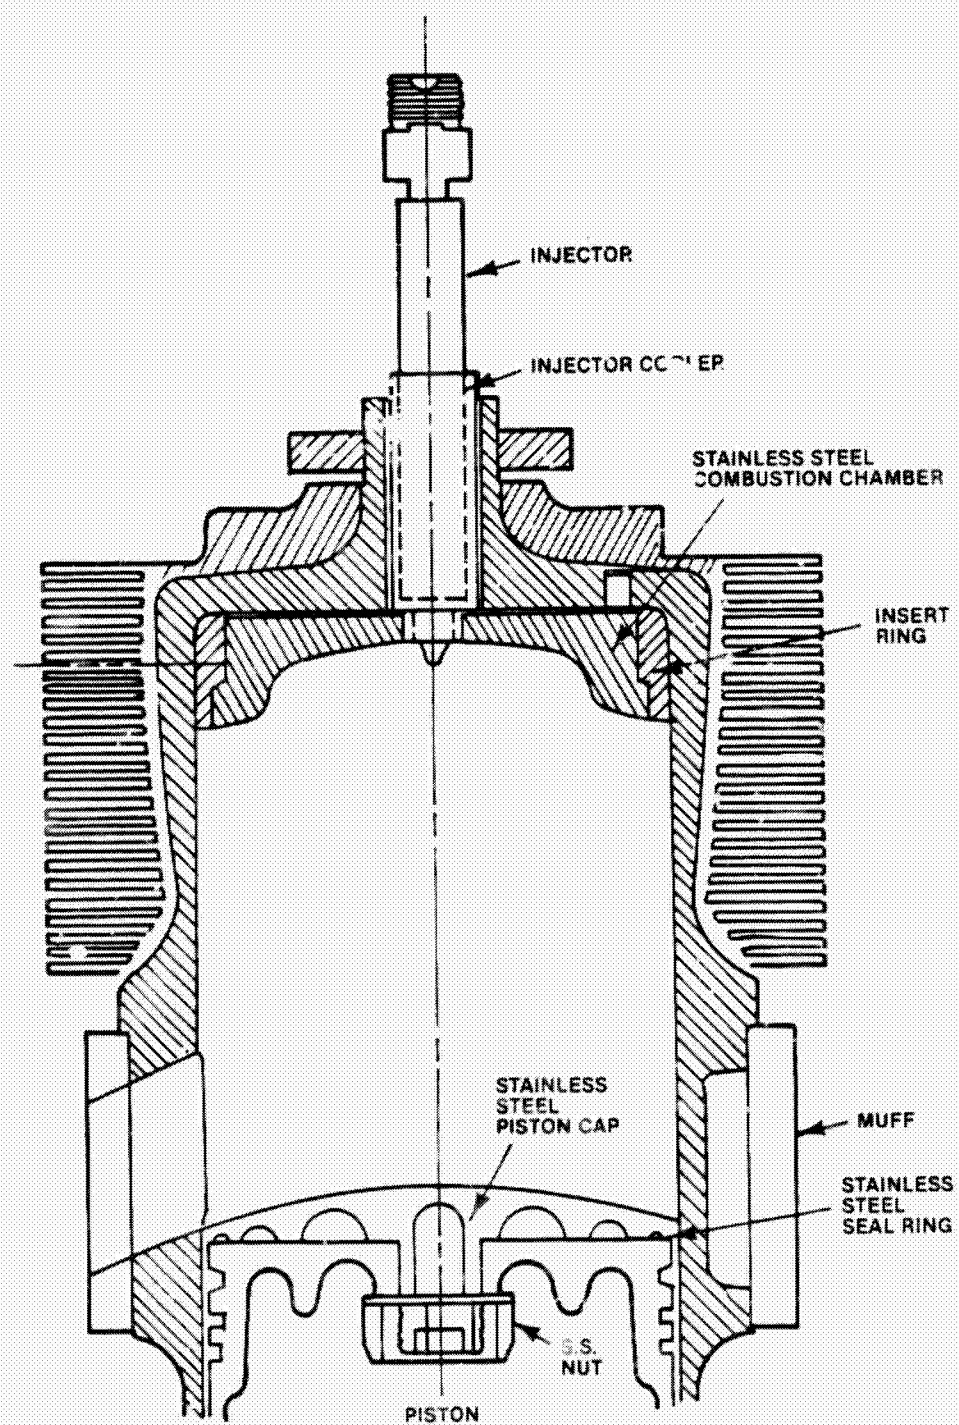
Air Gap Insulated Piston and Combustion Bowl Assembled in Cylinder
